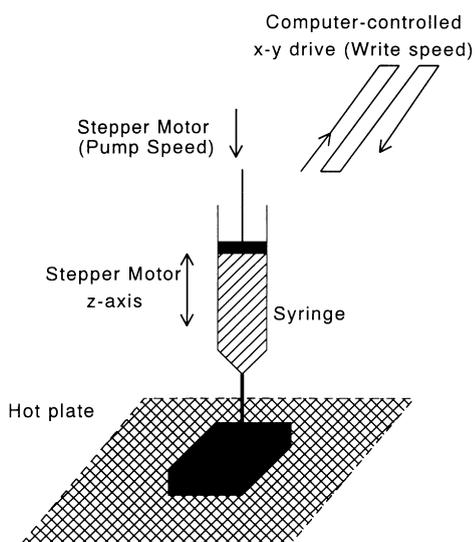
Sketch of extrusion freeform fabrication equipment.
